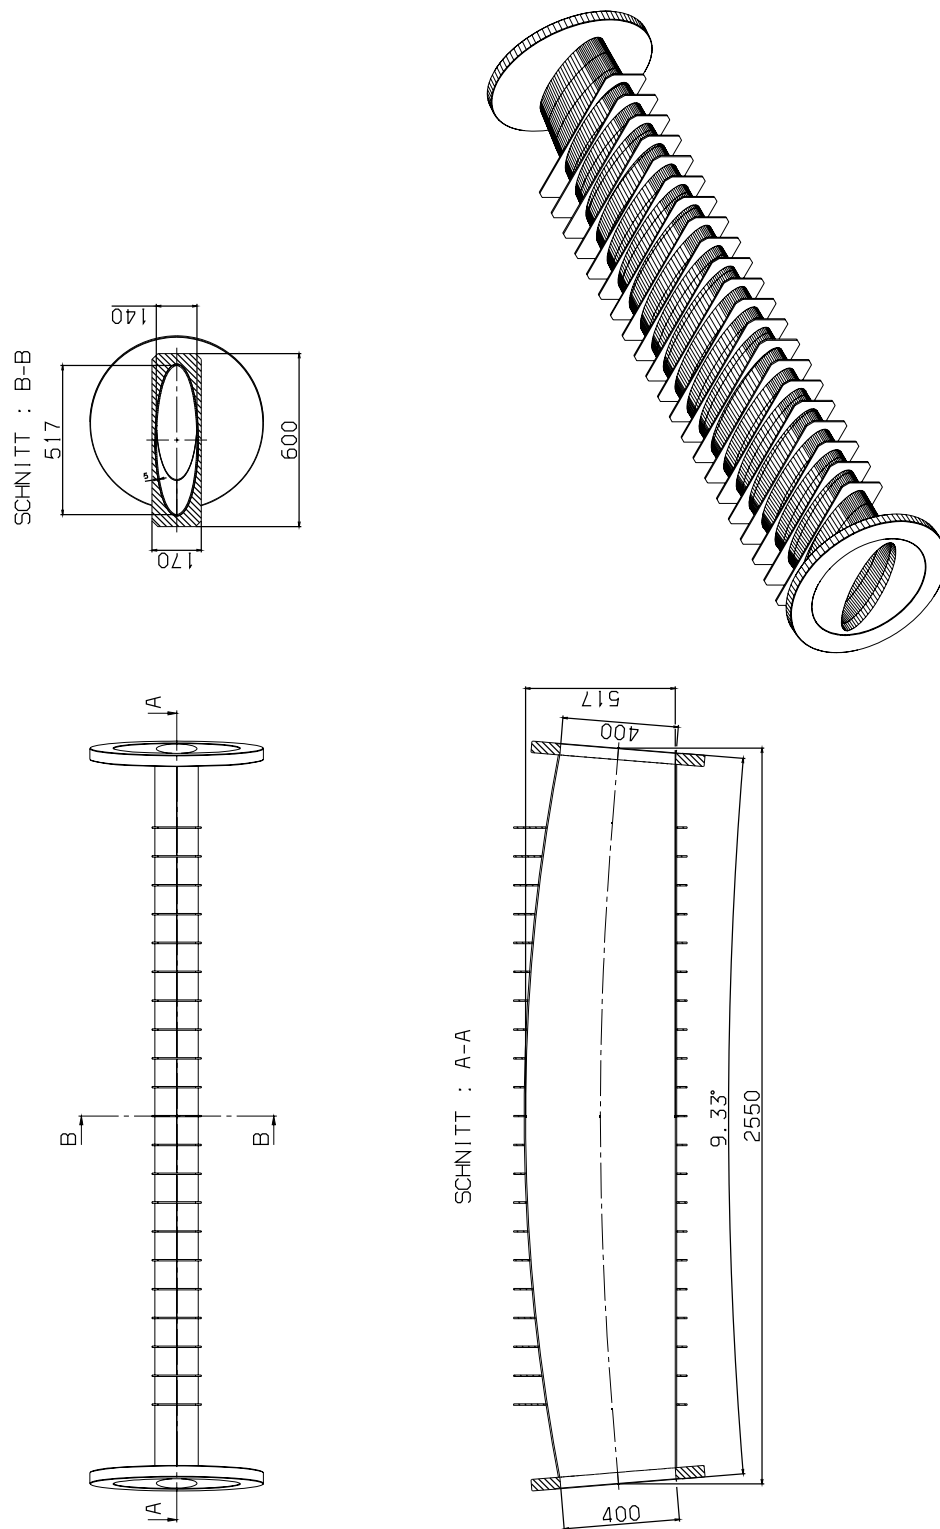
Vacuum chamber of a superferric dipole.
